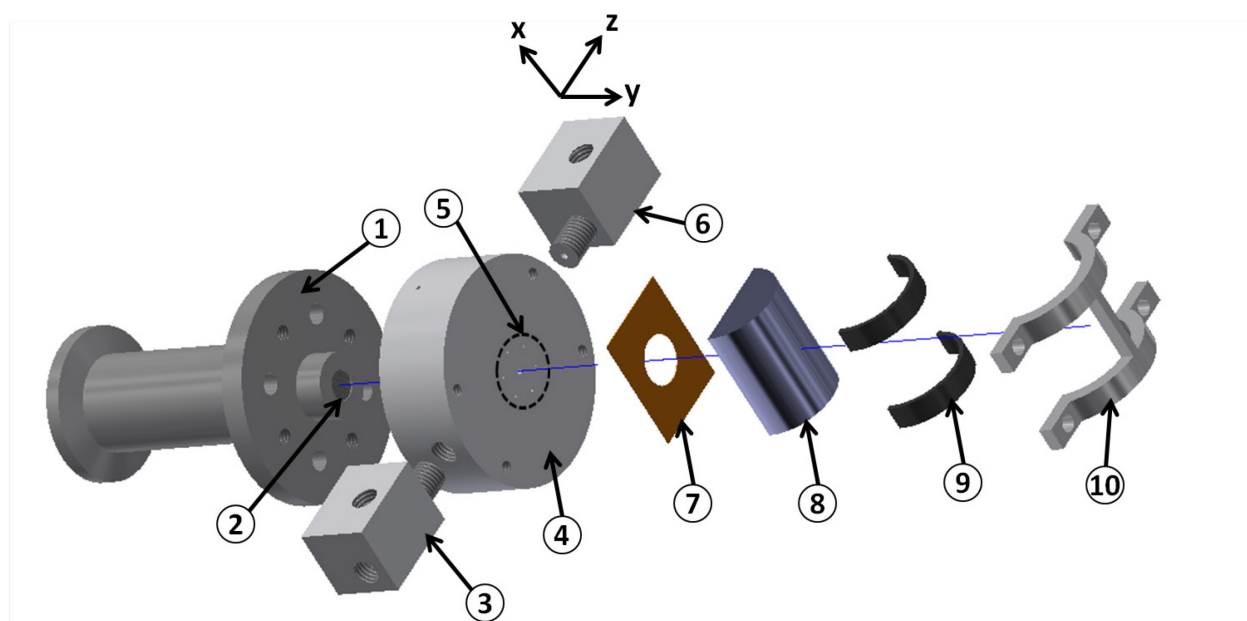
Exploded view of the ATR flow cell. 1- Stainless steel support with vacuum flange, 2- Steel frit, 3- Inlet port T-piece, 4- Main cell body, 5- set of 6 capillaries, 6- Outlet port T-piece, 7- Silicone Gasket, 8 – Si prism, 9 – Spacer, 10- Prism holder.
